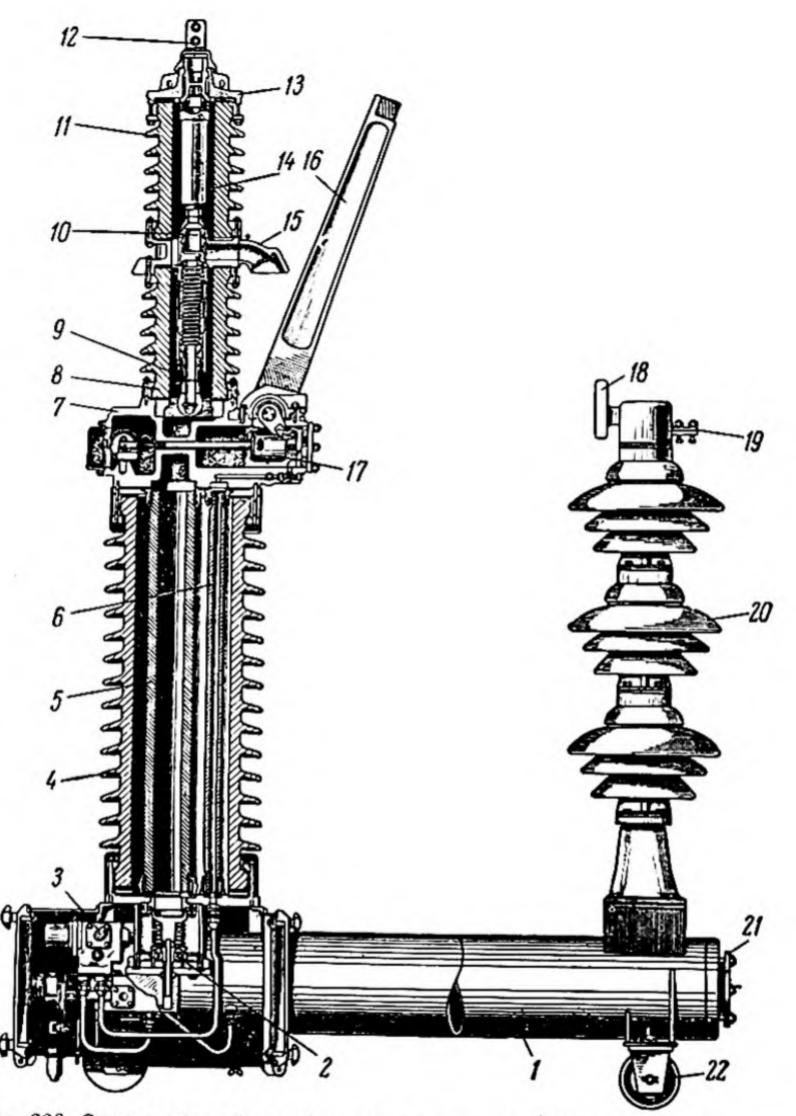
Cross section of one phase of a BBH-110 air-blast circuit breaker: 1—compressed air receiver; 2—air-blast valve; 3—control cabinet; 4—support Insulator; 5—opening air pipe; 6—closing air pipe; 7—support flange; 8—porcelain shell; 9—moving contact; 10—stationary contact; 11—porcelain shell; 12—upper terminal; 13—interrupter unit cover plate; 14—interrupter unit; 15—vent pipe; 16—isolator blade; 17—isolator operating mechanism; 18—stationary contact of isolator; 19—lower terminal of circuit breaker; 20—stationary-contact insulator stack; 21—air-receiver cover; 22—truck wheel
